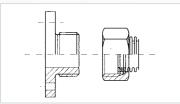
Screw coupling Male part with threaded flange PN 20 1.4301.
